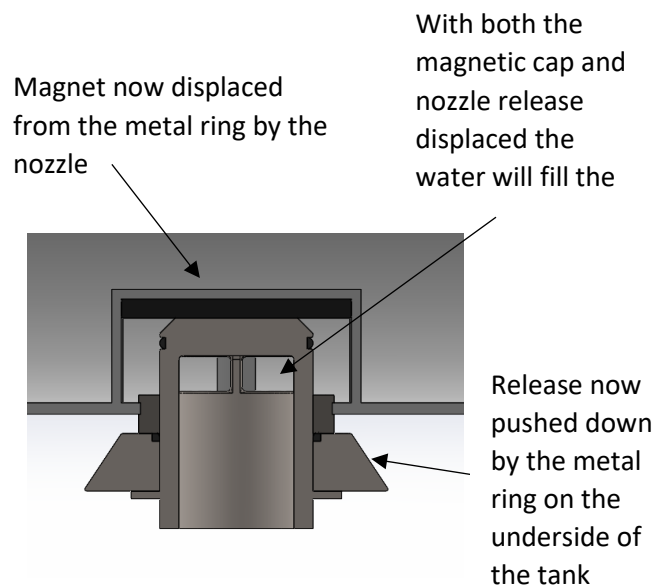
View of the connection inside the tank after contacting the nozzle
